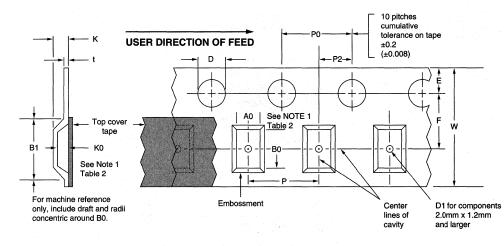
EMBOSSED CARRIER DIMENSIONS (24mm tape only)
